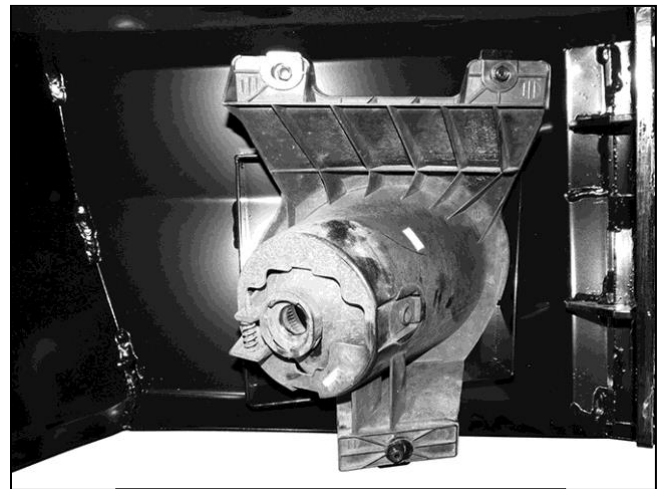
Attach Outer Support Bracket to flange on frame and center hole in Bumper Bracket
